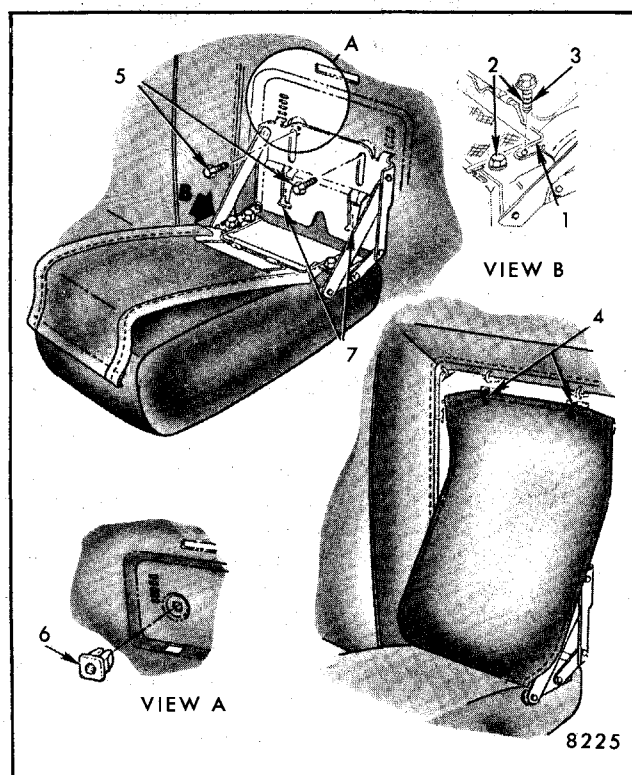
Front Seat Back Center Armrest - Standard Full Width Seat Back - "A and X" Styles
